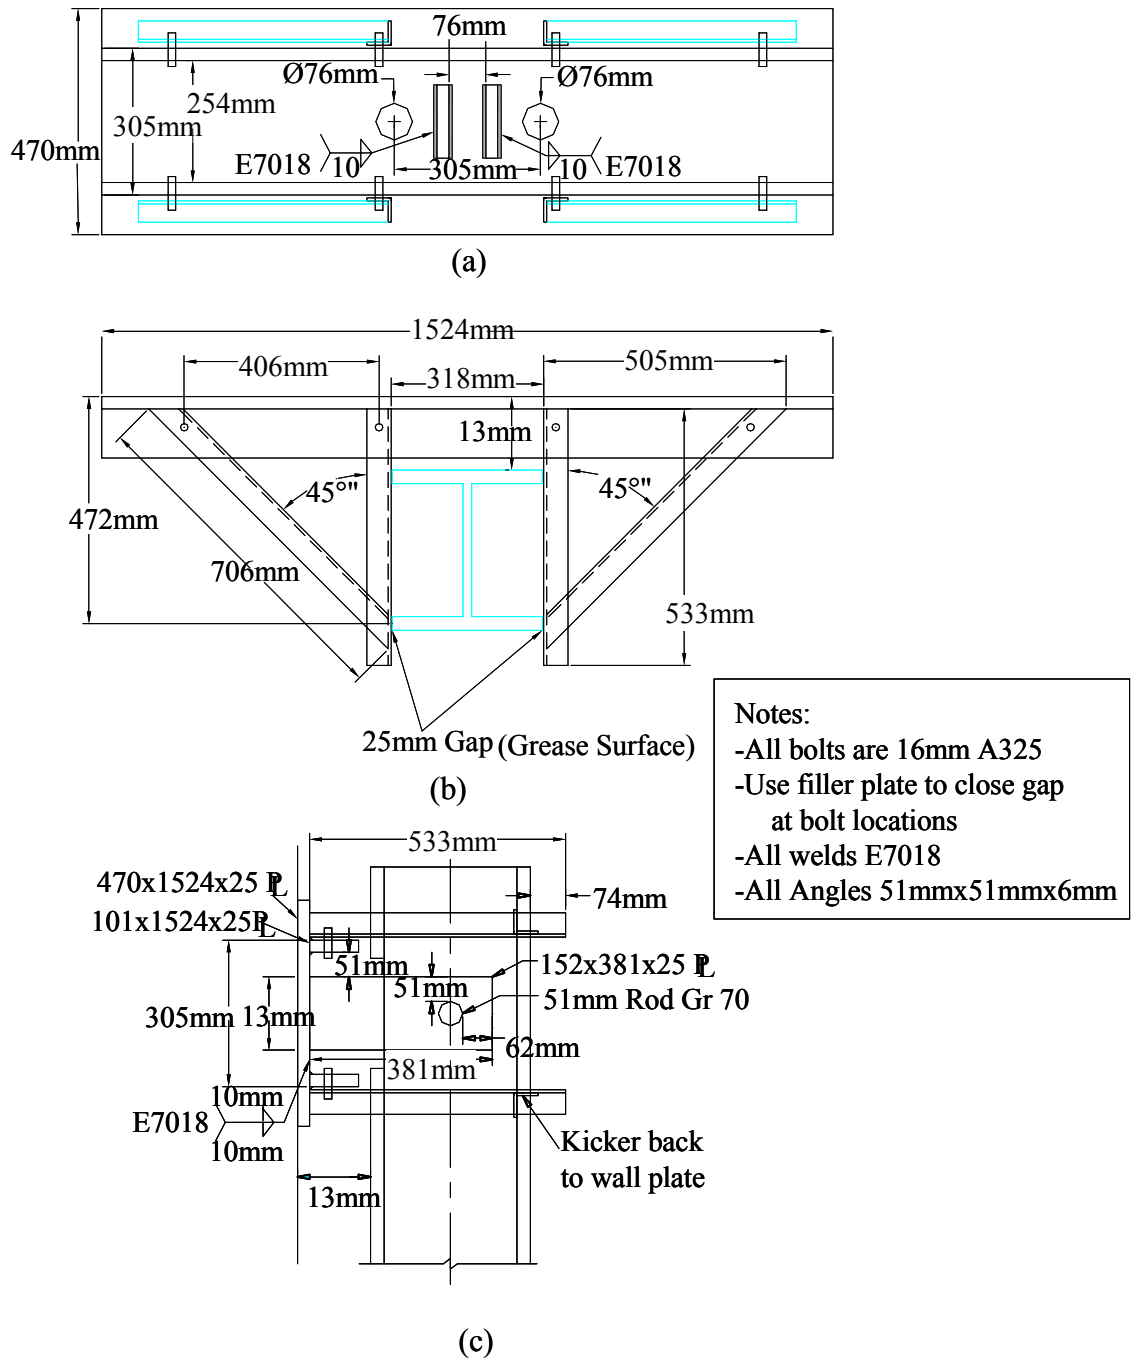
Clevis details for wall fixture: (a) front view; (b) top view; and (c) side view
